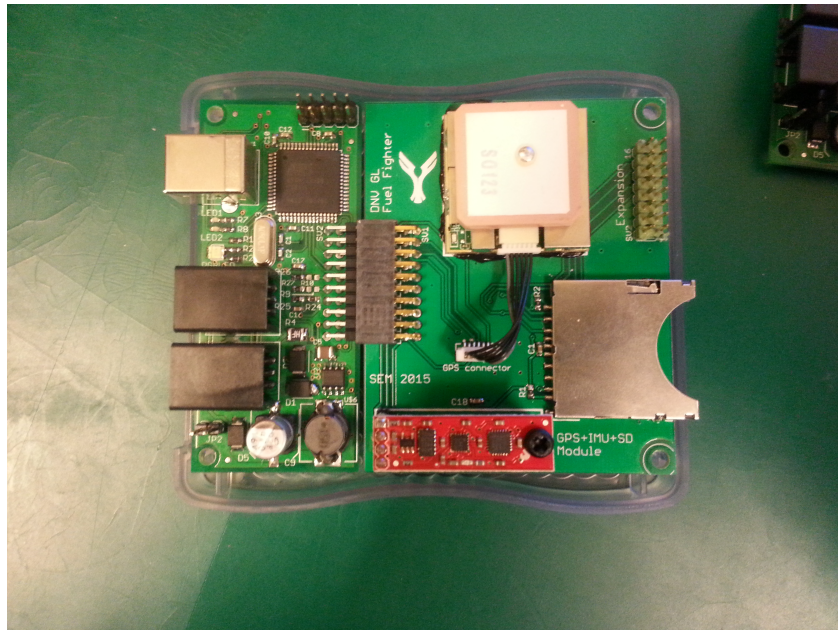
GPS, IMU and SD circuit board connected to universal module.
